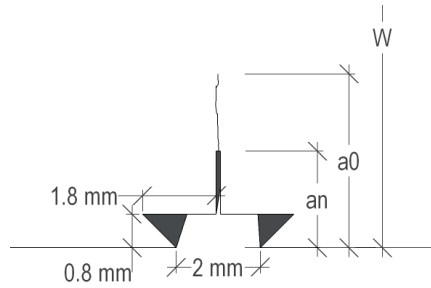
Detail A from figure 4.11, showing the spark eroded notch with pre-stressed fatigue crack
